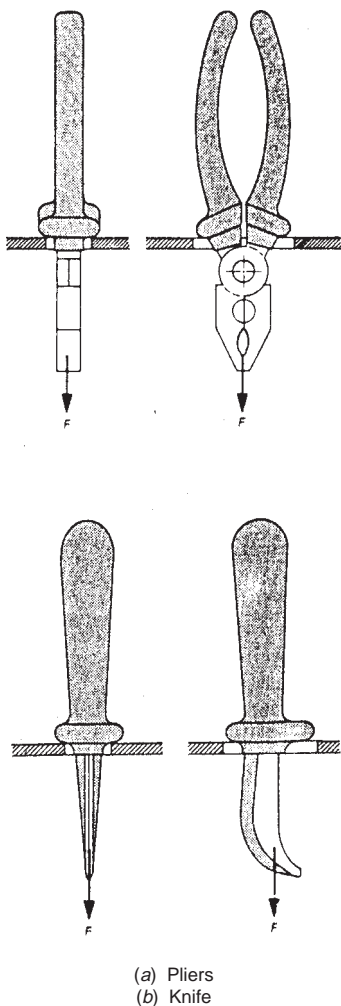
Examples of Mountings for Checking Stability of Adhesion of the Insulation of the Entire Tool
